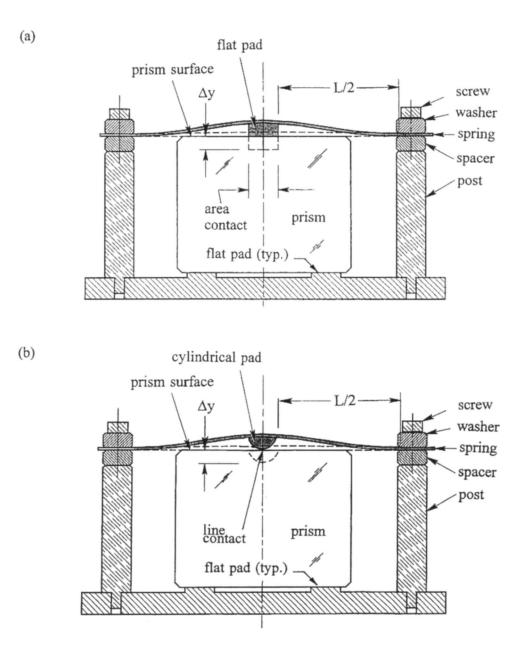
Straddling spring constraints for a prism: (a) With a flat pad, (b) with a cylindrical pad.
